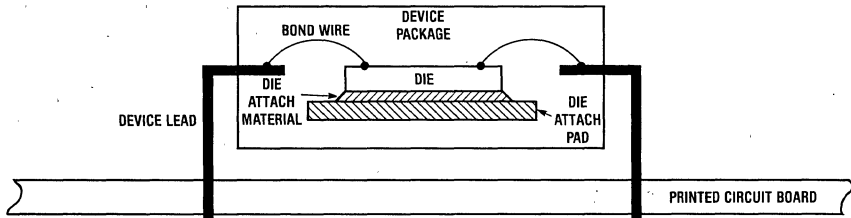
Integrated Circuit Soldered into a Printed Circuit Board (Cross-Sectional View)
